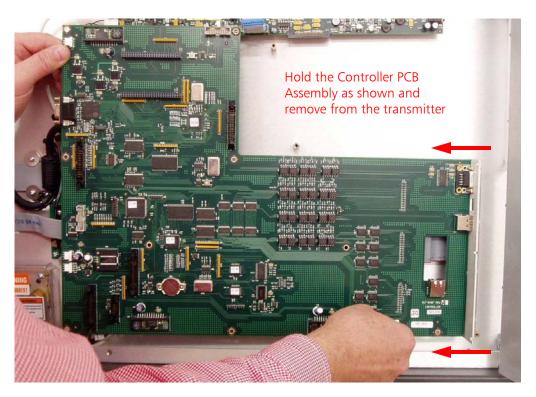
Remove the Controller PCB from the 4MX 25/50
